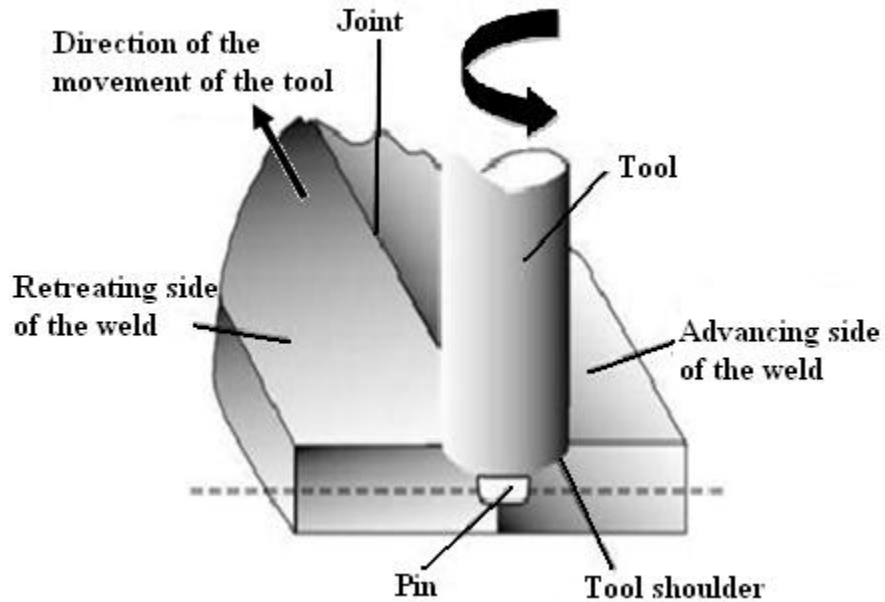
Two metal pieces butted together (Somasekharan, 2005).
